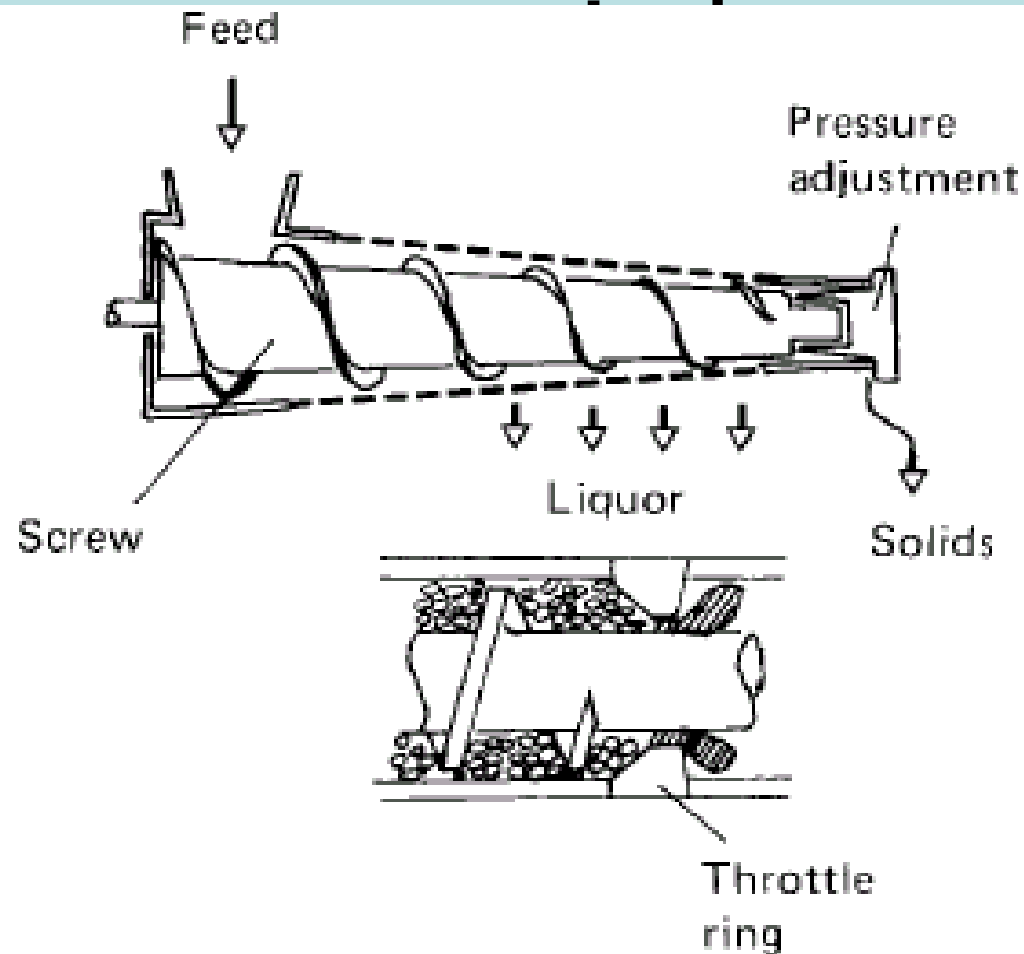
Screw press, showing throttle ring used for oilseed pressing.
